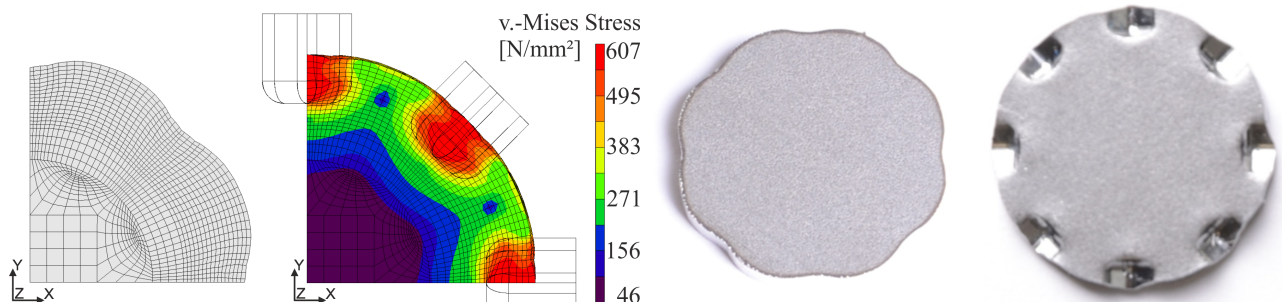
In contrast the forming process with the optimal blank design of the workpiece, determined by the inverse mechanical formulation, results in the desired circular geometry.
